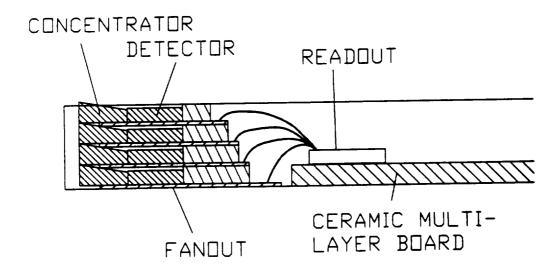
Cross Section of Ge:Ga Detector Assembly
